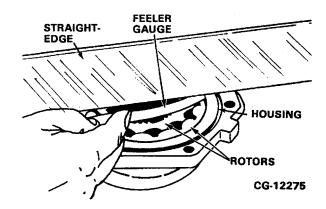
Check Housing to Rotor Clearance (Method One)
